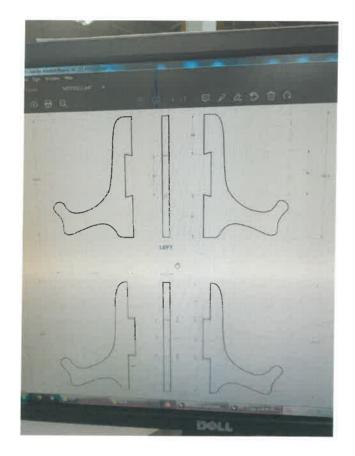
Final result of technical drawing need to be saved in PDF format
